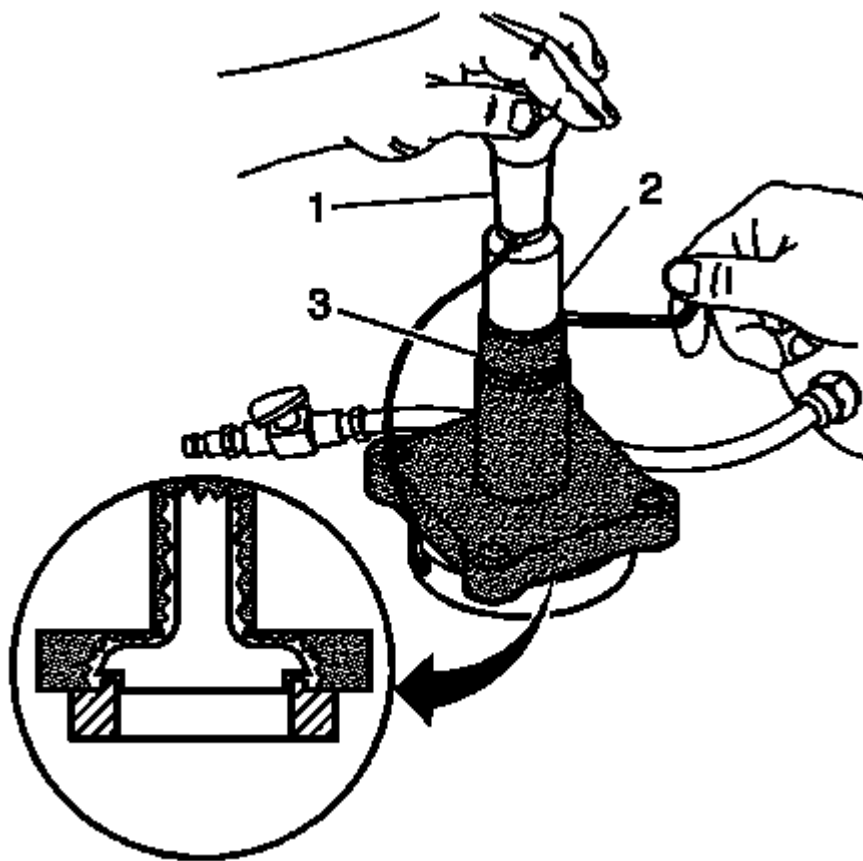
View Of Trim Tool Assembly Components & Positioning
